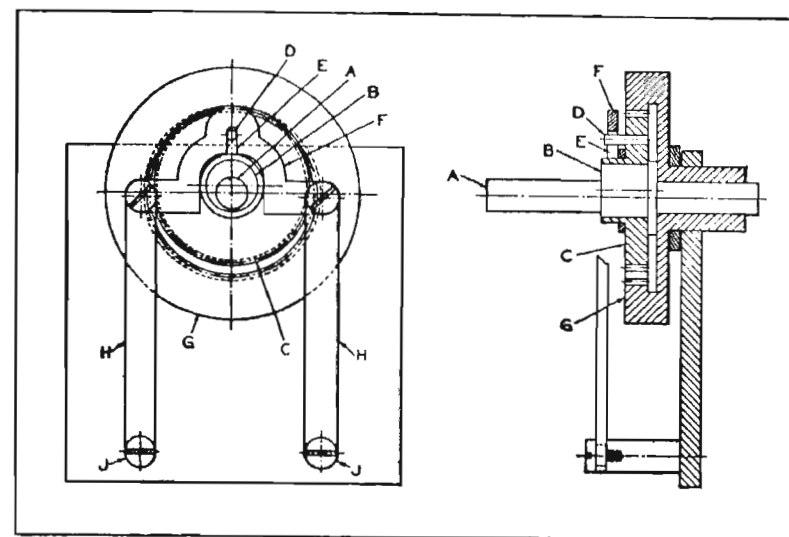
Internal-external Gear Reduction Mechanism which Provides Uniform Speed.
